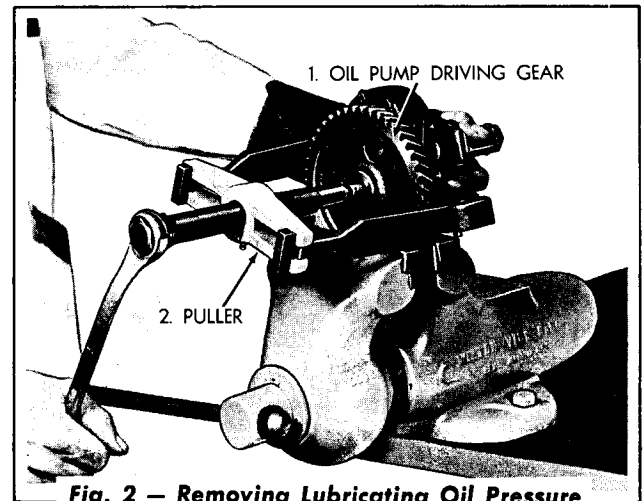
Removing Lubricating Oil Pressure Pump Driving Gear
